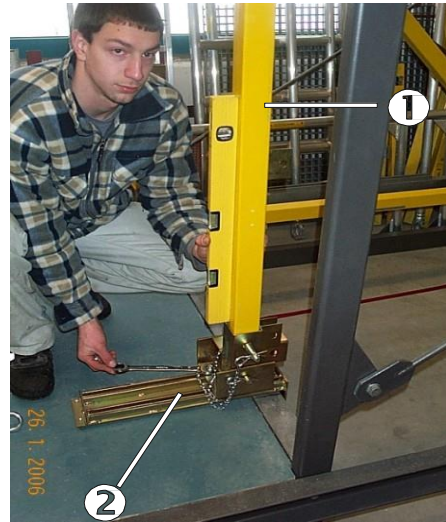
Front vertical triangle side, placed into assembled threshold joint
